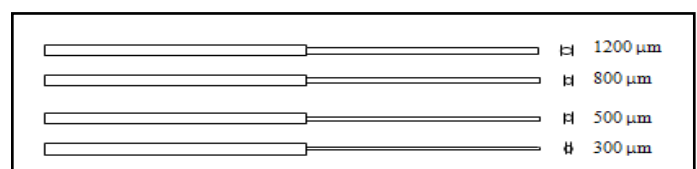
Schematic View of Micro Tool During Grinding Steps
